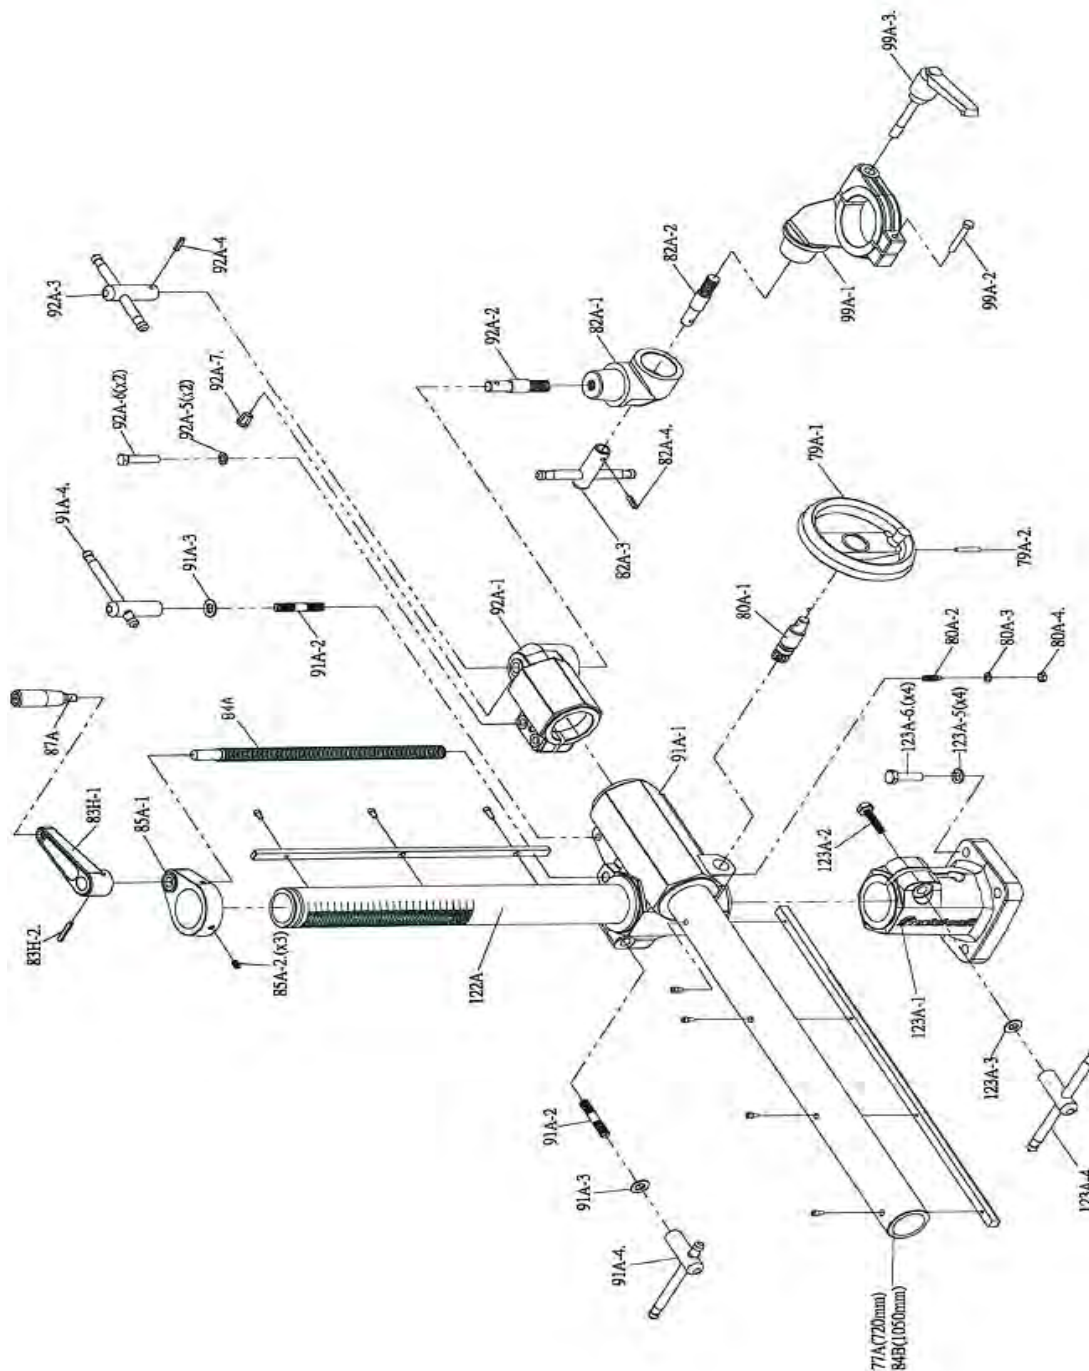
Spare parts drawing 2 -tripod of feed unit VSA 48 L
